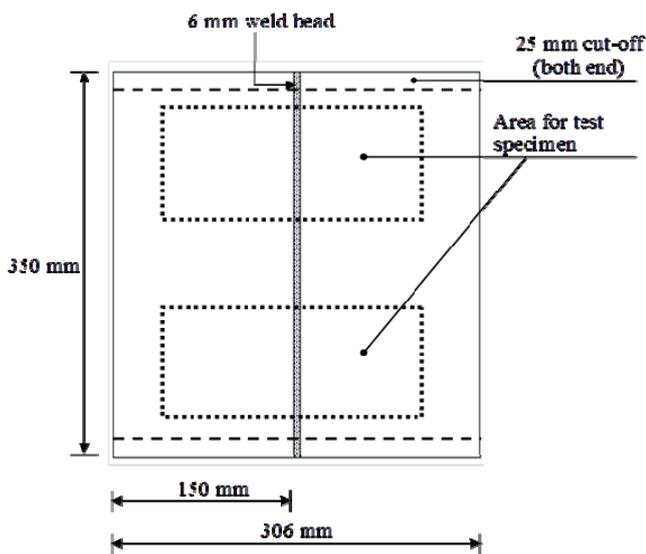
Test piece showing locations of test specimens for the butt joint in plate
